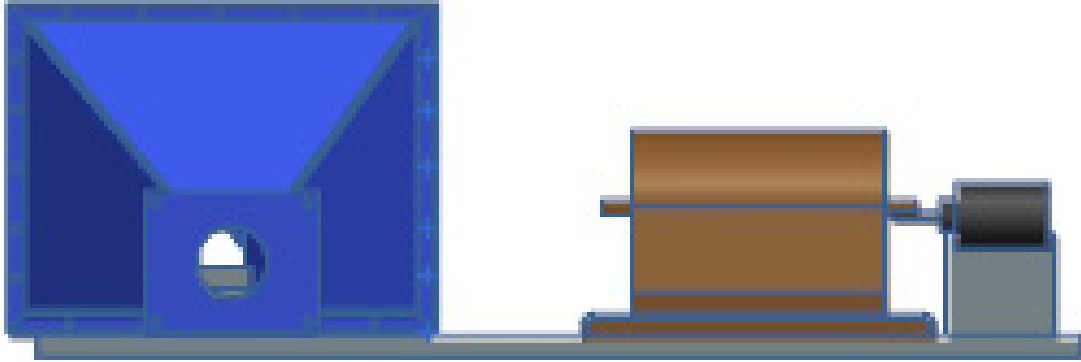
Side view of CAD model showing dynamometer, starter motor, base plate, and exit nozzle.
